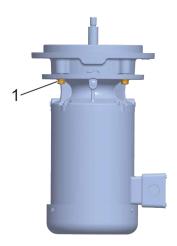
Key in the motor shaft (example: herborner.F-N)
